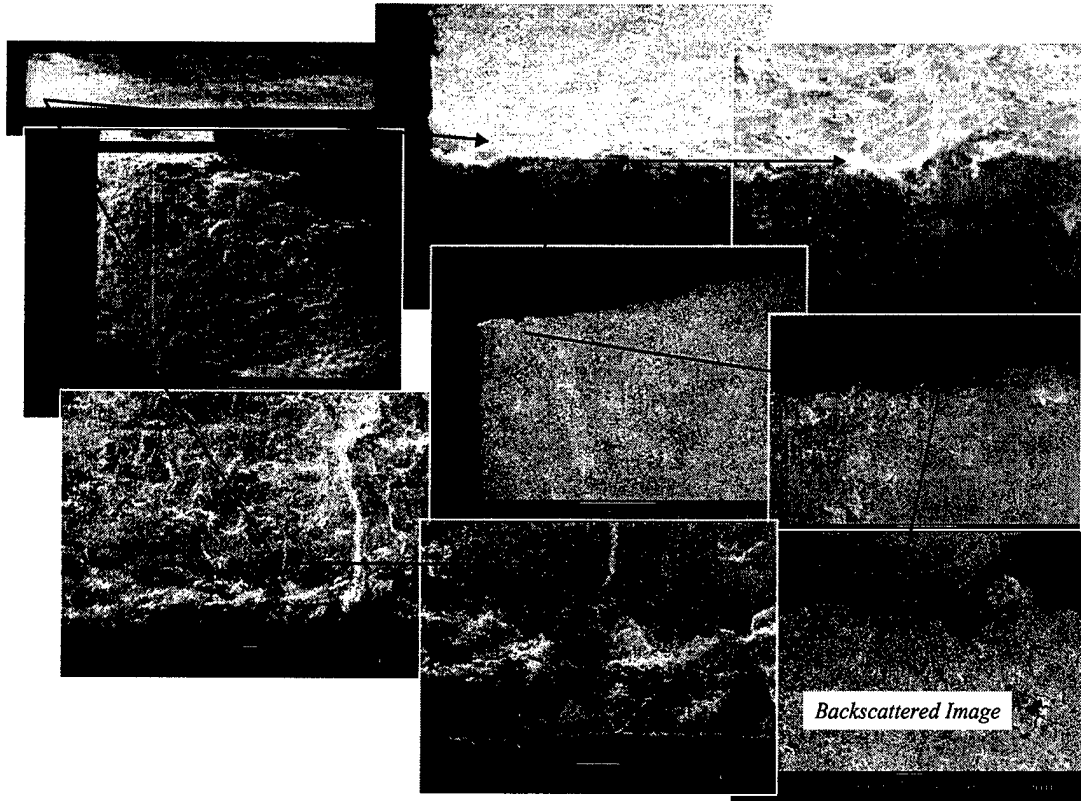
Fracture Surface of Specimen 45-1 Showing a Dominant Crack But No Discernible Pits
